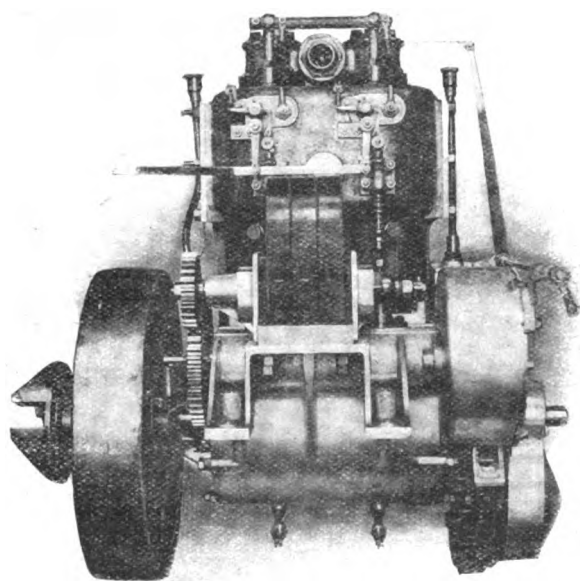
The Georges-Richard 12-h.p. Motor—Inlet Side.
